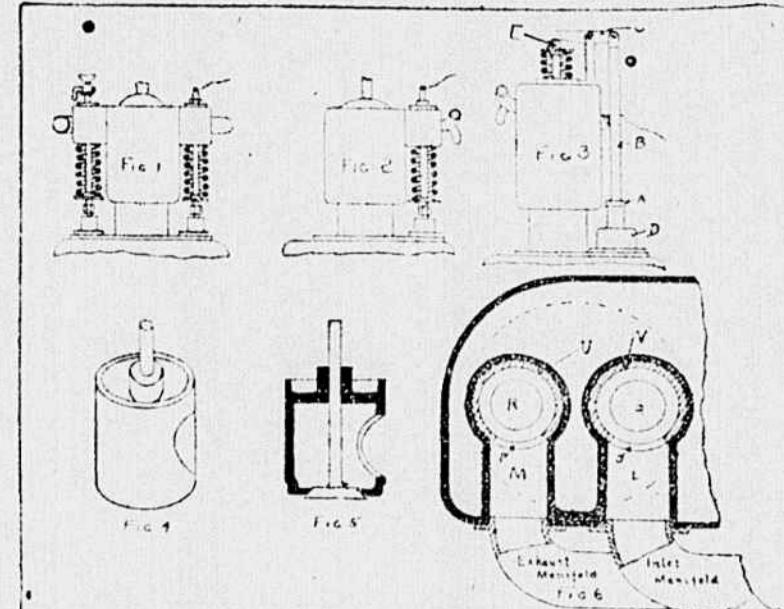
shows the overhead, or valve-in-the-head, motor. D is the valve-lifter guide. A the valve lifter. These parts you will notice are the same in the T and L-head motors, and it is the push rod, which rests in a hollow on the valve lifter, while C is the rocker arm, and E the valve stem.
